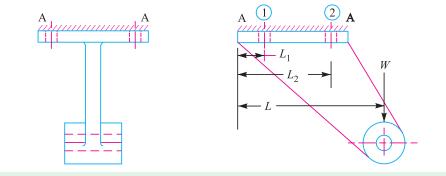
Eccentric load acting parallel to the axis of bolts.
